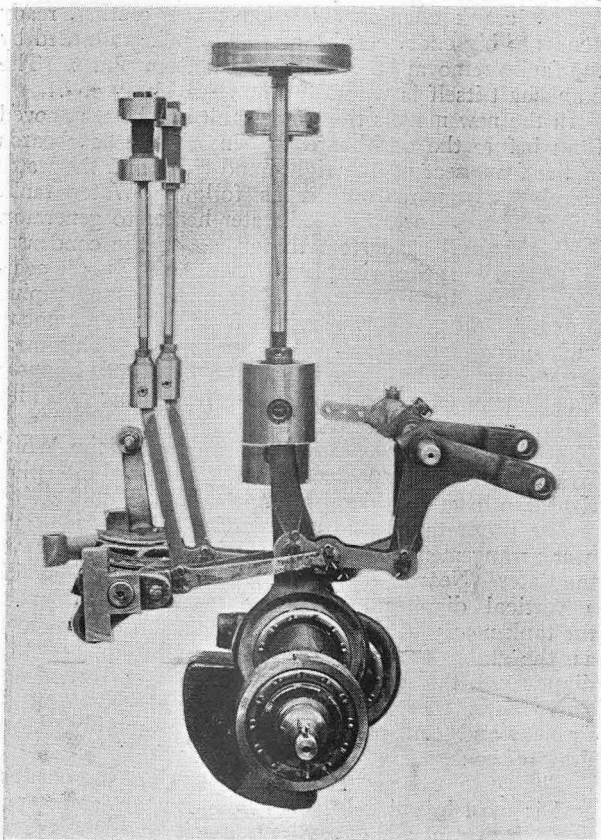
View of crankshaft in ball bearings, connecting rods, cylindrical cross head guides, valve actuating gear, and pump operating rocking levers worked off connecting rods, valve spindle guides and piston valves, and piston rods and pistons.
